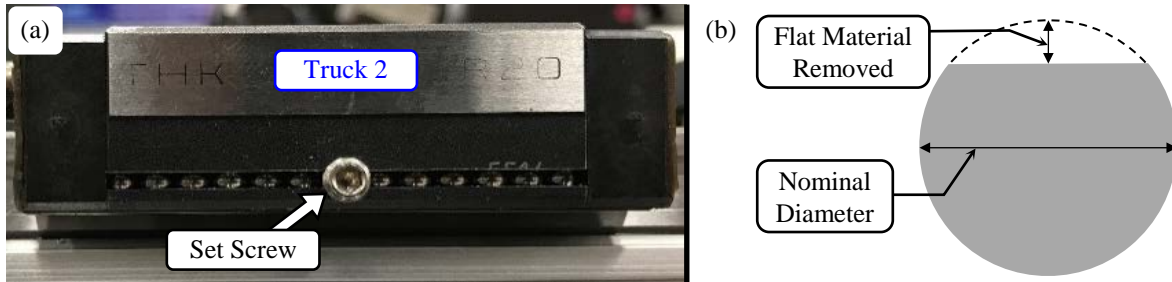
(a) Truck 2 as modified for this experiment with a slot for viewing the bearing movement and an access hole covered by a set screw, which allowed for the removal of single bearing ball; and (b) diagram showing the damage introduced to the balls in Truck 2.
